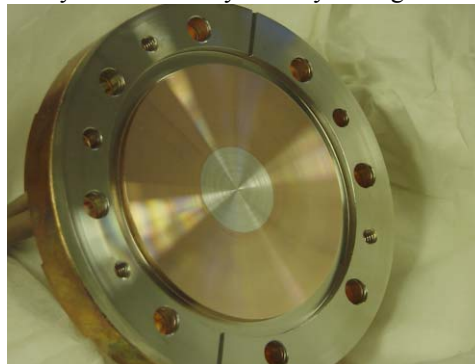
Mg cathode manufactured using frictional welding technique.
